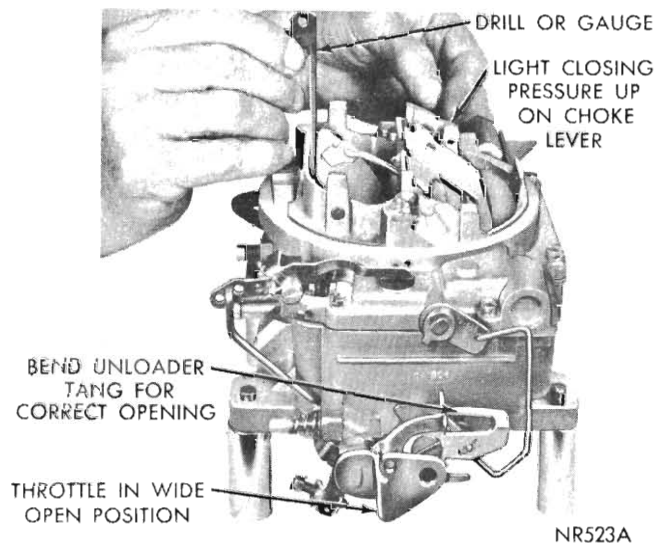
Checking Choke Unloader (Wide Open Kick)
